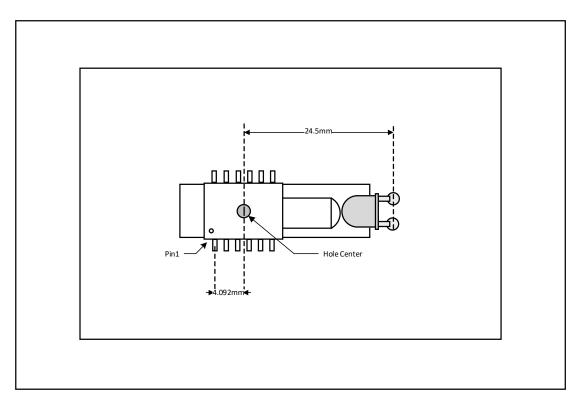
2D Assembly drawing of A725 (Top and Side View)
